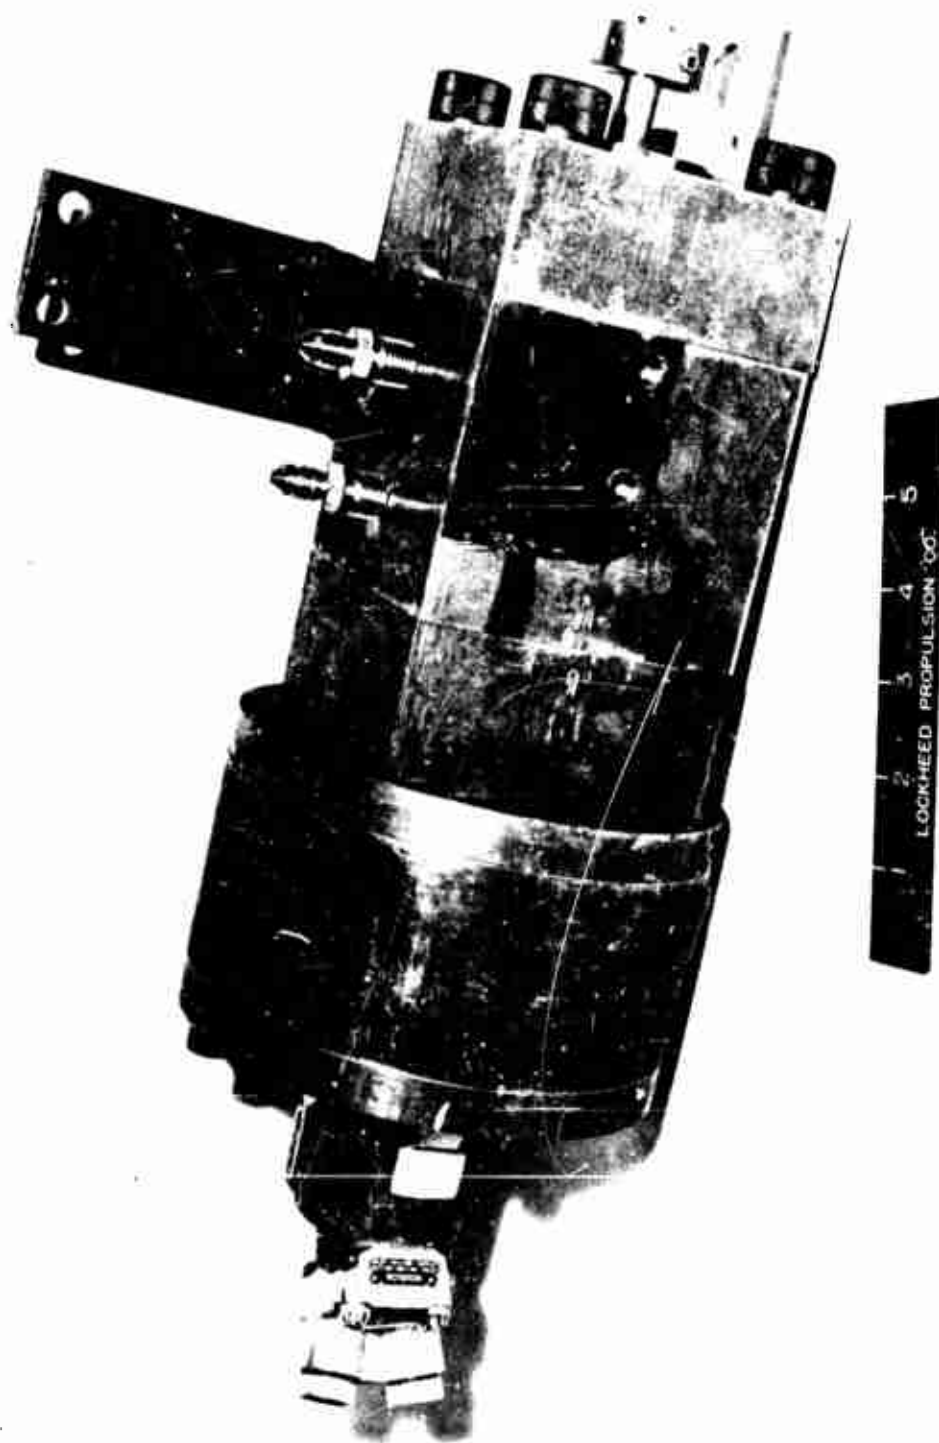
Photo of Rotary Valve Assembly with Hydraulic Motor
